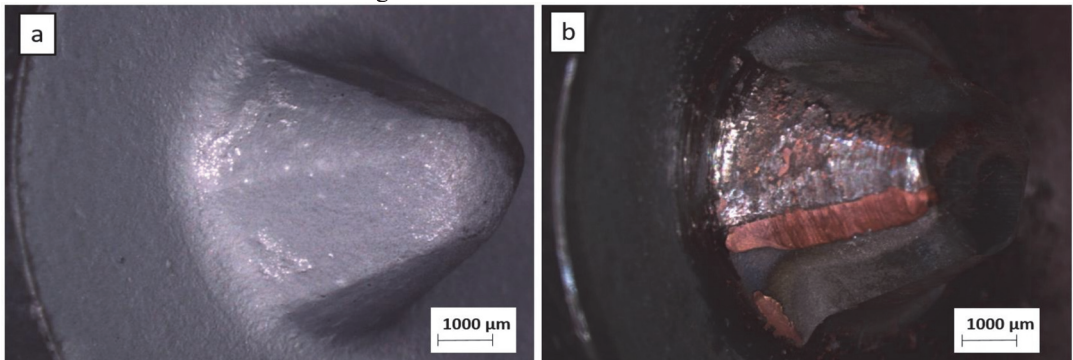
Image of the FSW tool before (a) and after welding of copper (b).
